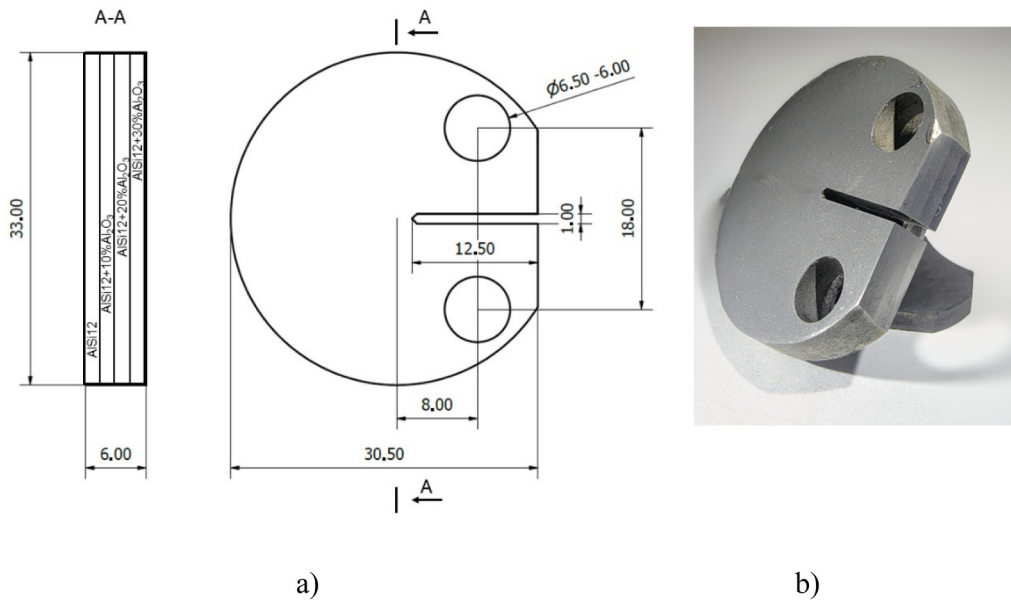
Disc-shaped compact tension specimen made of four composite layers with 0%Al₂O₃, 10%Al₂O₃, 20%Al₂O₃, and 30%Al₂O₃: a) Dimensions of the specimen (mm); b) Photograph of the specimen used in fracture tests.
